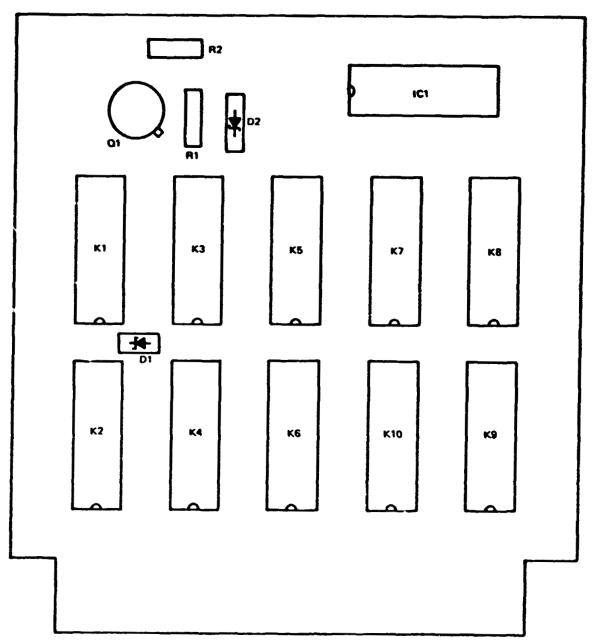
Temperature Scanner Remote Unit - Relay Card Layout (Sheet 6 of 9)
